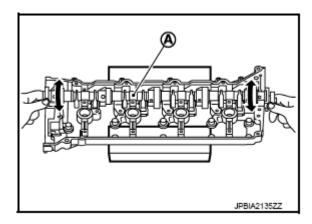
Checking Drive Shaft Operation Courtesy of NISSAN NORTH AMERICA, INC.
